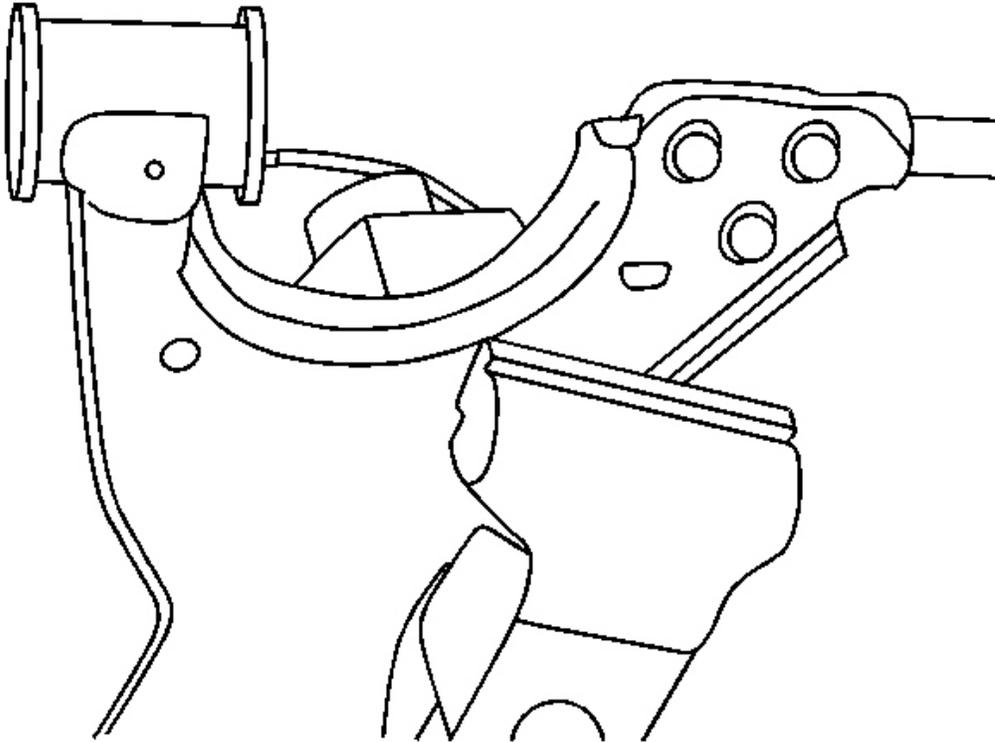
View Of Lower Control Arm In A Soft Jawed Vise
